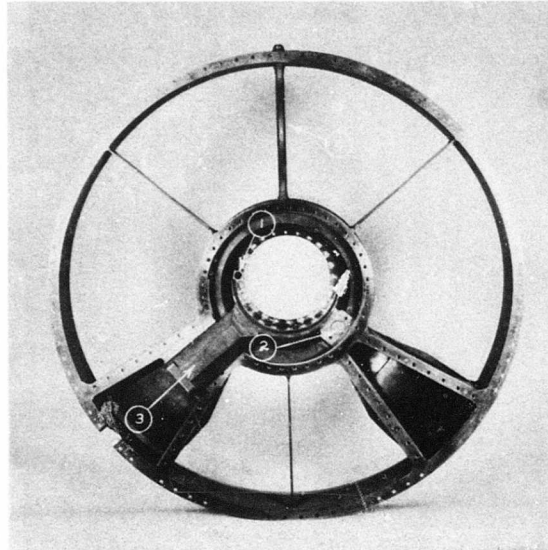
Exterior View of Front Housing: (1) Oil Feed Boss, (2) Breather Connector Boss, (3) Drive Shaft Boss, (4) Oil Scavenge Line.
